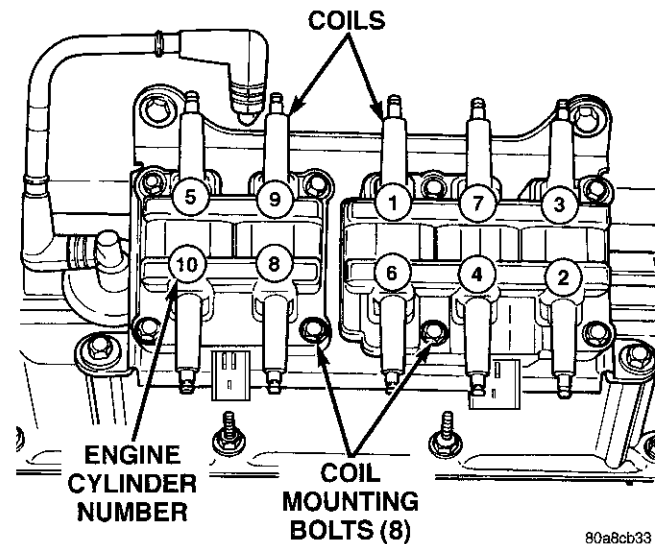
Ignition Coil Packs—8.0L V-10 Engine
